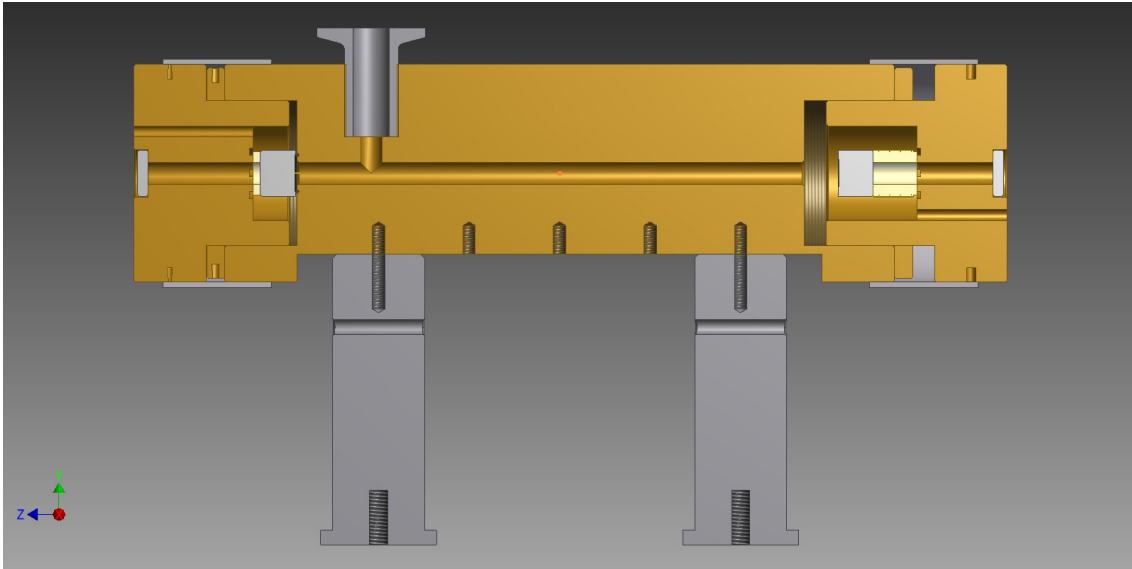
Cross-sectional view of the assembled scanning cavity.
